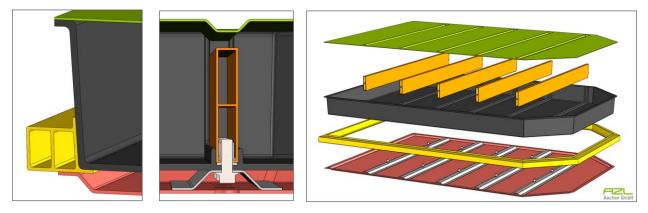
Cross-section details and exploded view of an SMC box variant. Bottom protection plate, edge profiles and cross beams are aluminum, box is SMC, lid is solid laminate.
